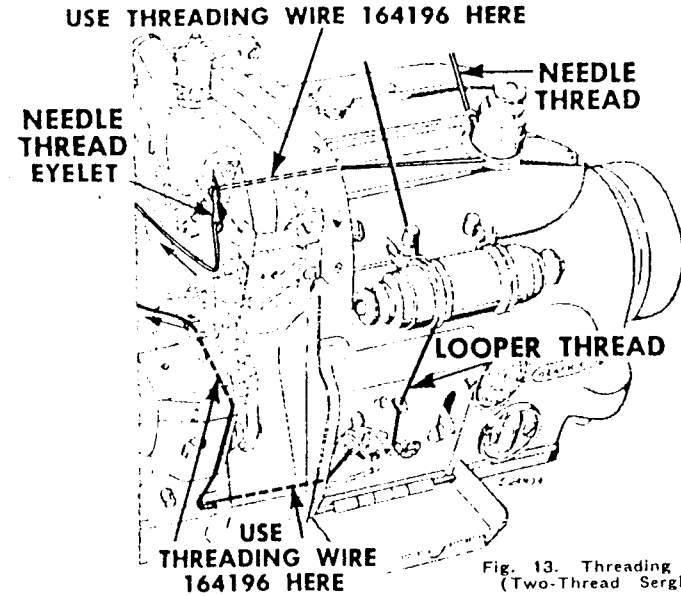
Threading the Machine (Two-Thread Serging Stitch)
